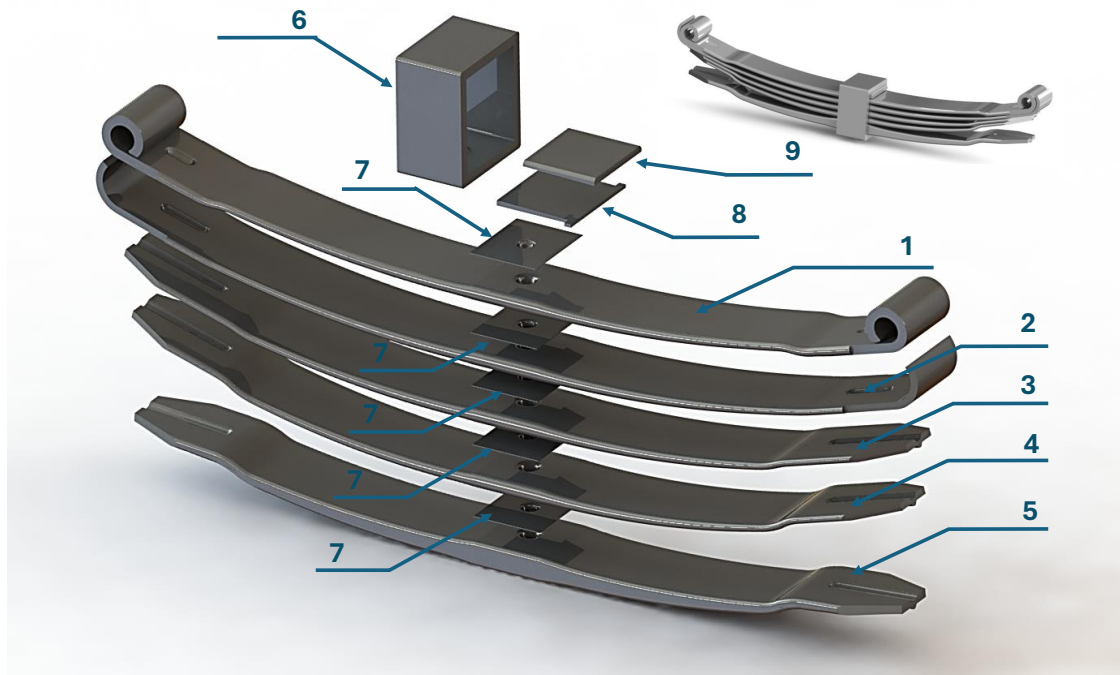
Illustration of an assembled and a disassembled UIC parabolic leaf spring and the identification of its respective structural and assembly components.
